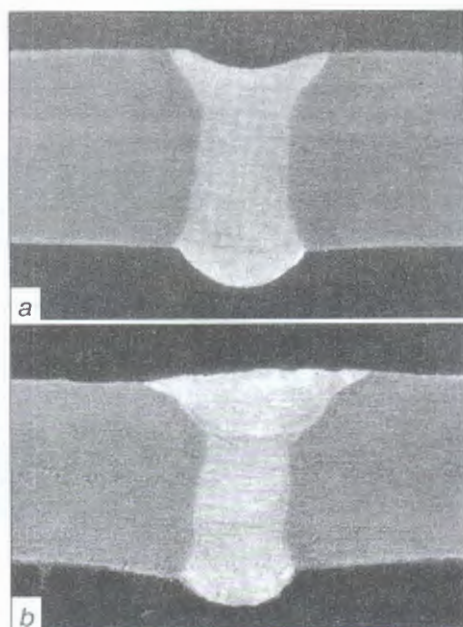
A-TIG weld made using no filler wire without (*a*) and with (*b*) self-pressing
